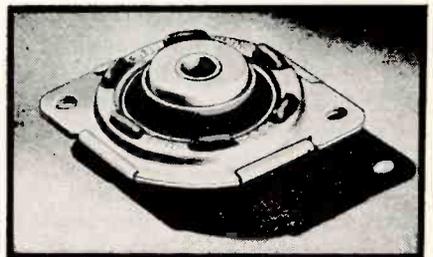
In this non-bonded mounting by Harris Products Co. the outer support is crimped together with rubber lugs projecting through the metal. The central mounting hole is stabilized by a tube and retaining rings
